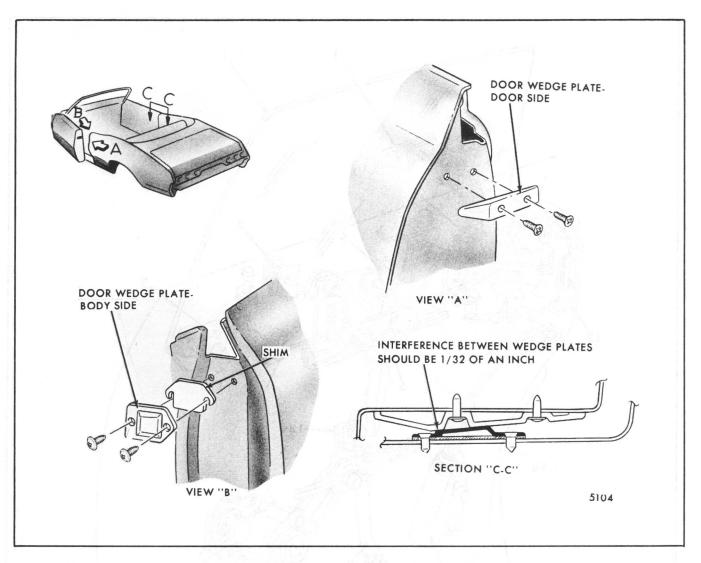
Door Wedge Plates - "E-67" Styles
